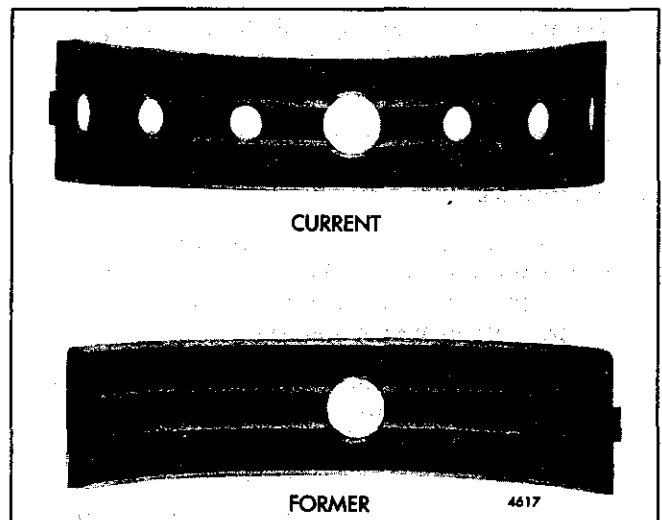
Old and New Upper Main Bearing Shells (V-Type Engines)
